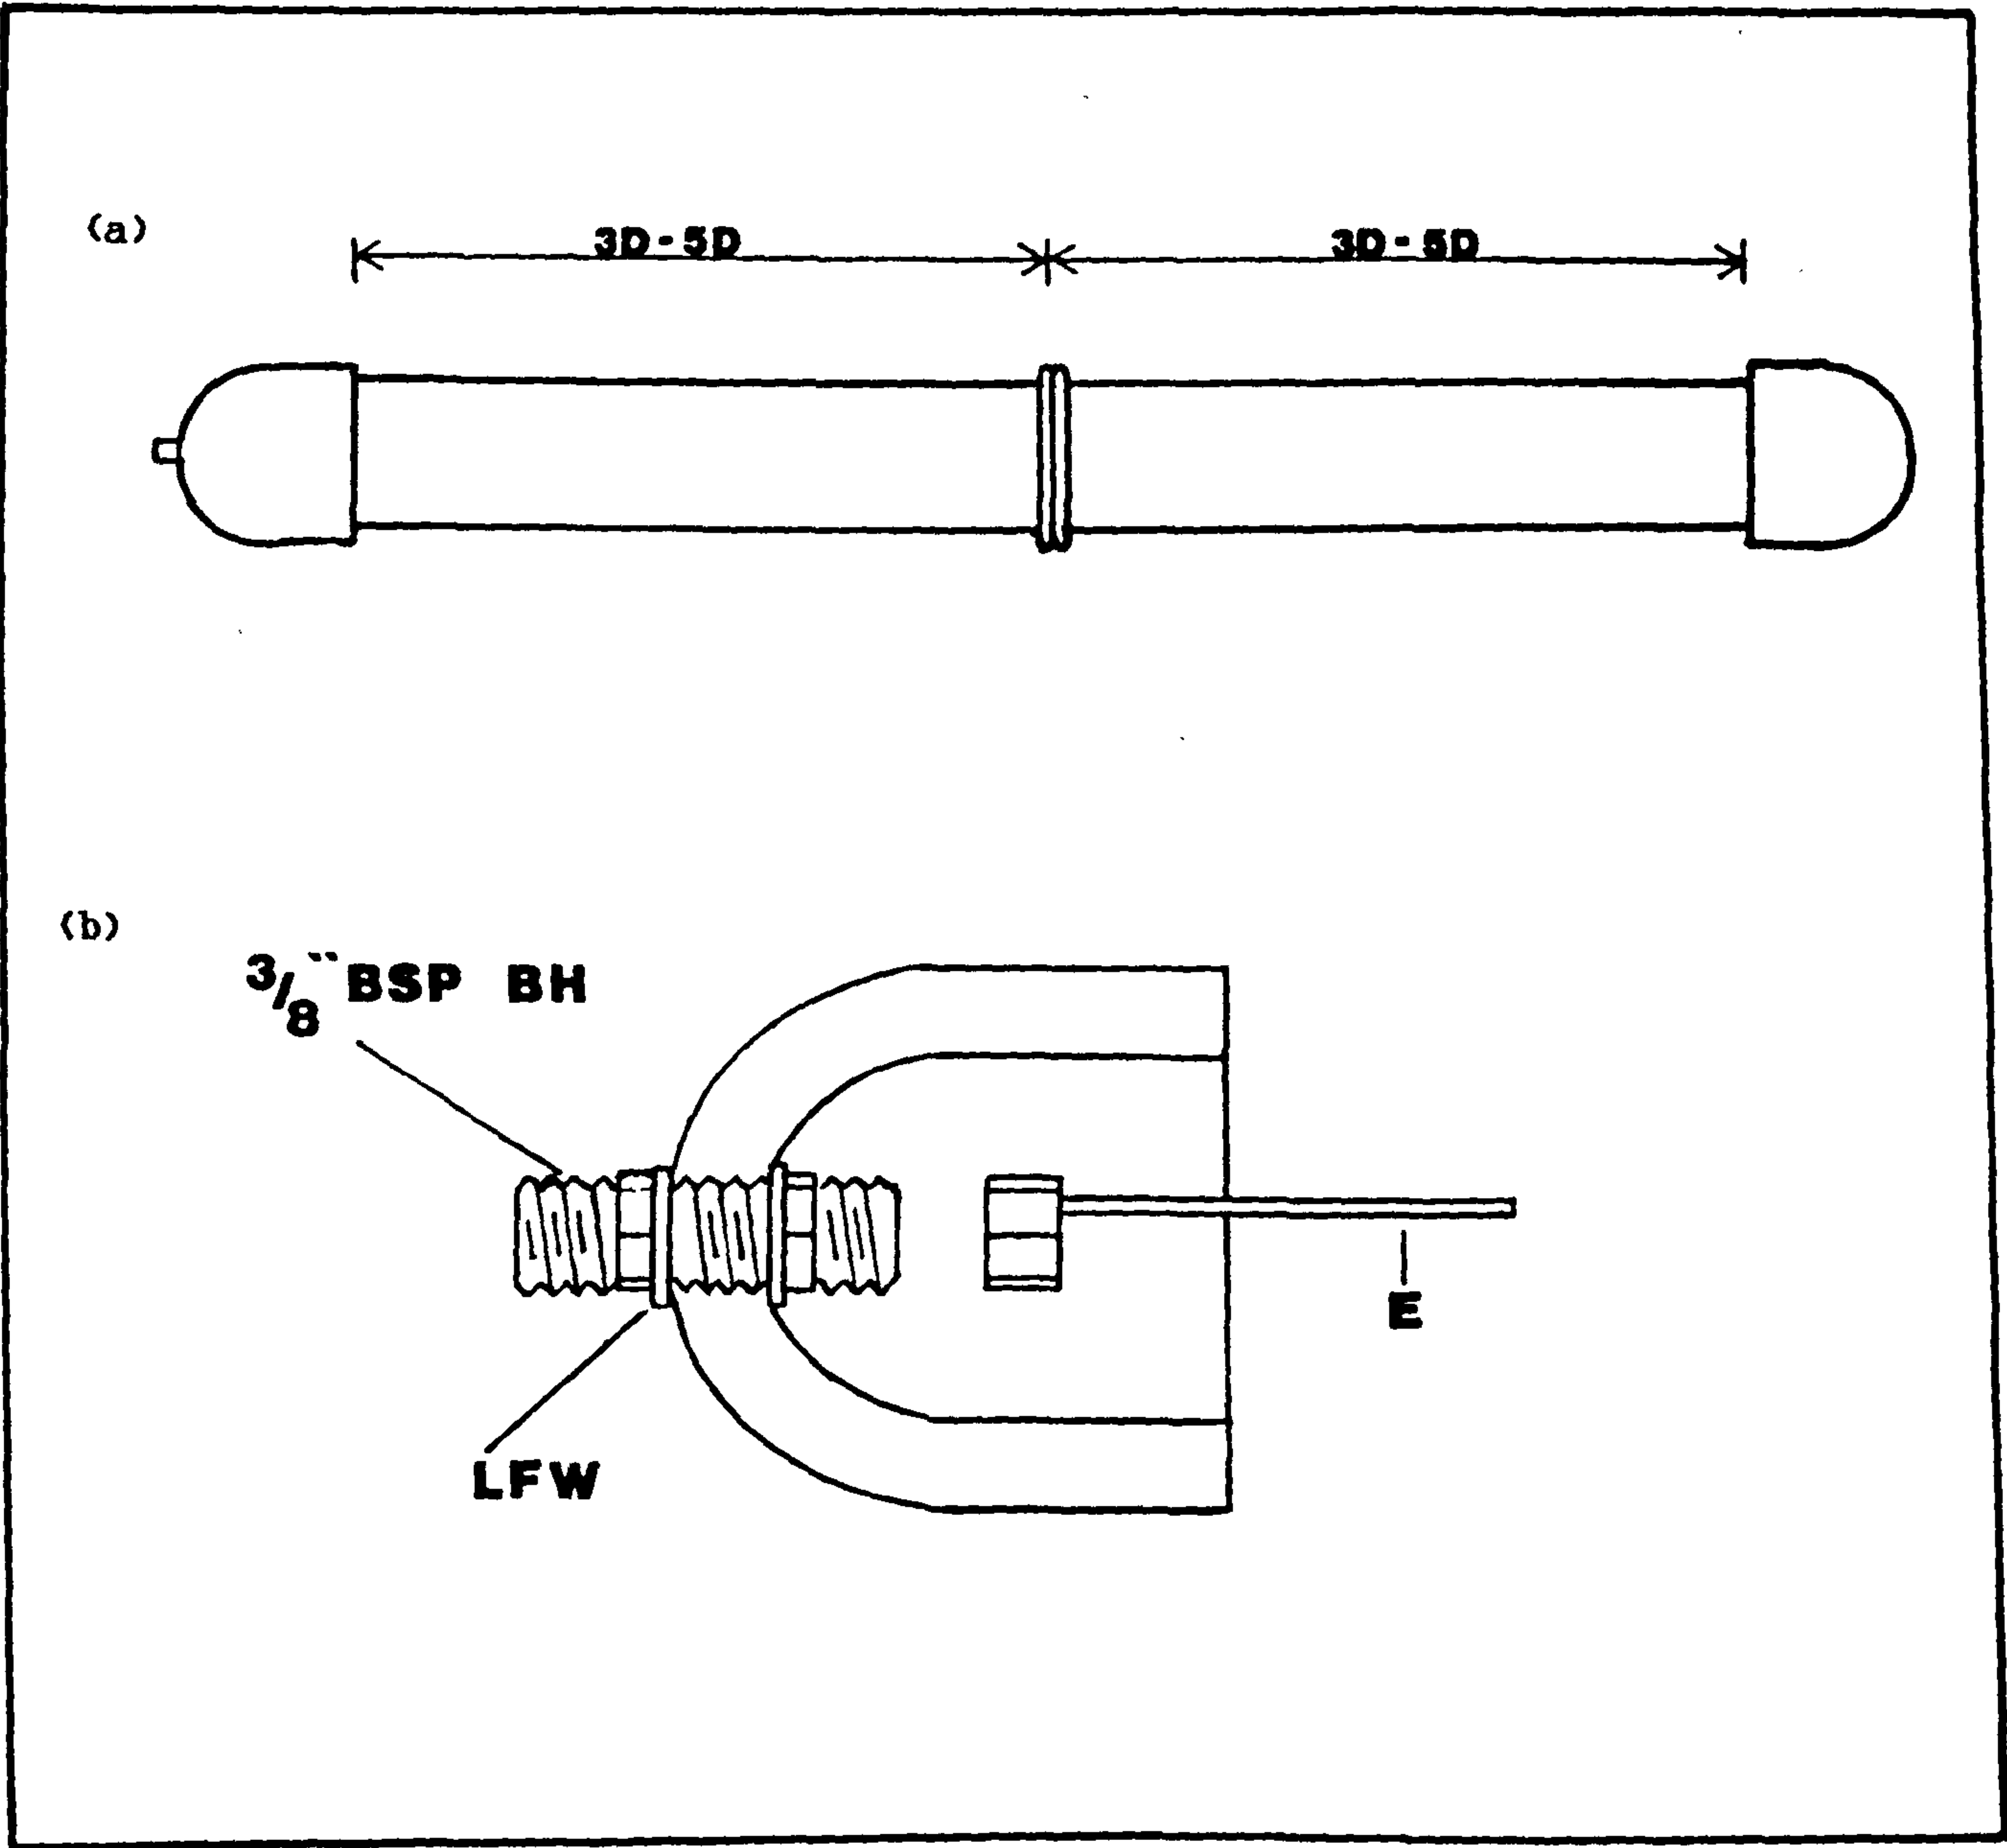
(a) Test specimen. (b) Detail - view of Top end Cap.
